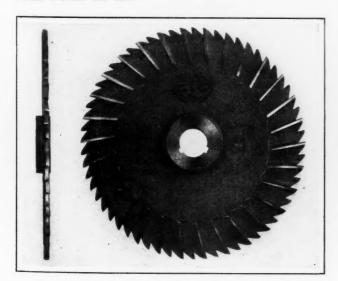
Alternate-tooth Saw for Heavy Service in cutting Steel
